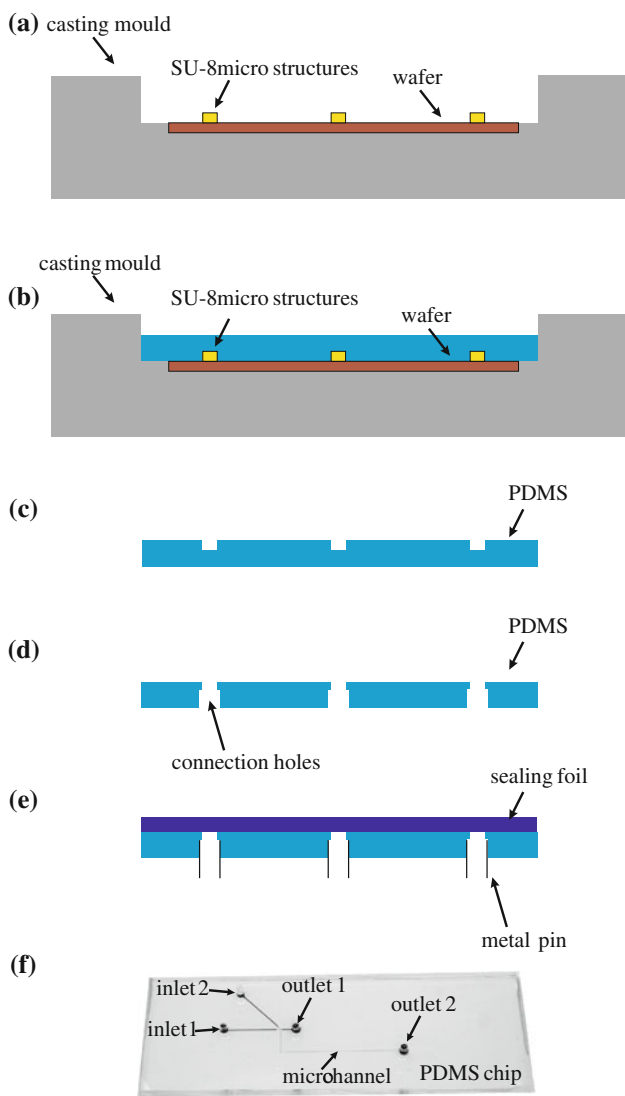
Process chain of the molding process. a The molding master is placed into the molding cast. b The PDMS is casted over the molding master and the system is degassed. c After curing the PDMS, the PDMS chip is removed from the molding cast. d The chip is connected through punch holes before the chip is finally sealed as illustrated in e. f The PDMS microchip with two inlets, the focusing region of the device and the two outlets, whereas all fluidic connections are realized by metal pins
